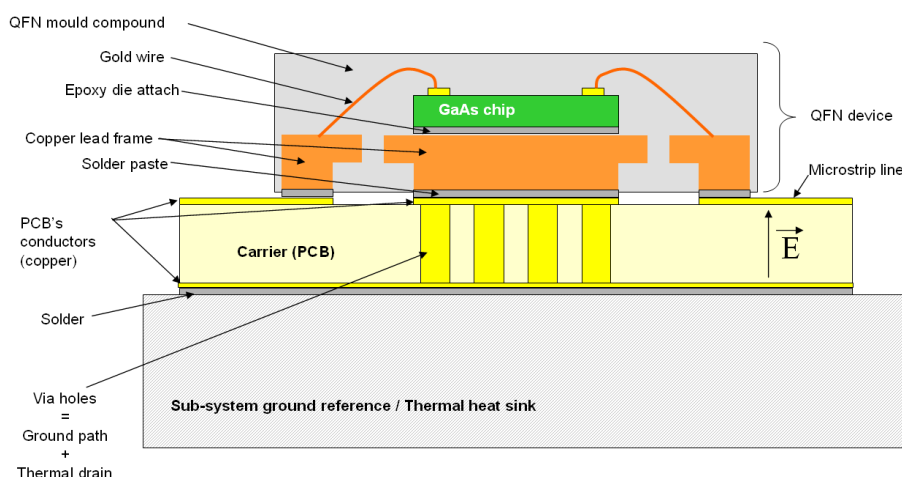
Cross section view of a QFN device assembled on a PCB.
